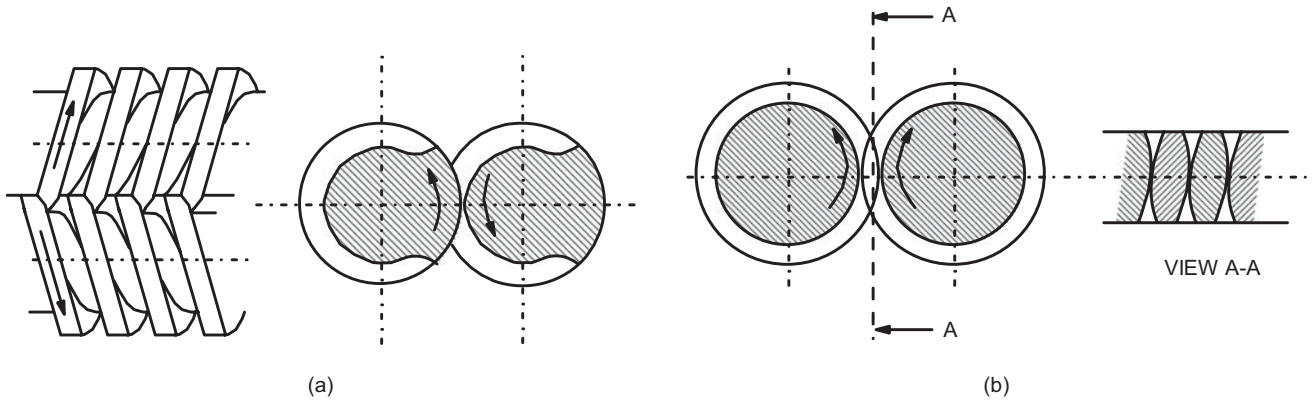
Closely intermeshing counterrotating twin-screw extruder. (a) Cross-sectional view (end view). (b) Cross-sectional view through flights showing open region.
